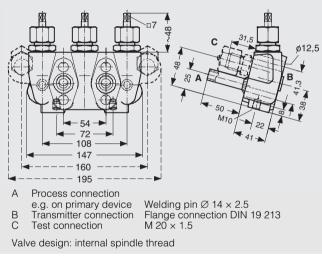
/71 Three-way valve manifold DN 8 with welding pin, dimensions
